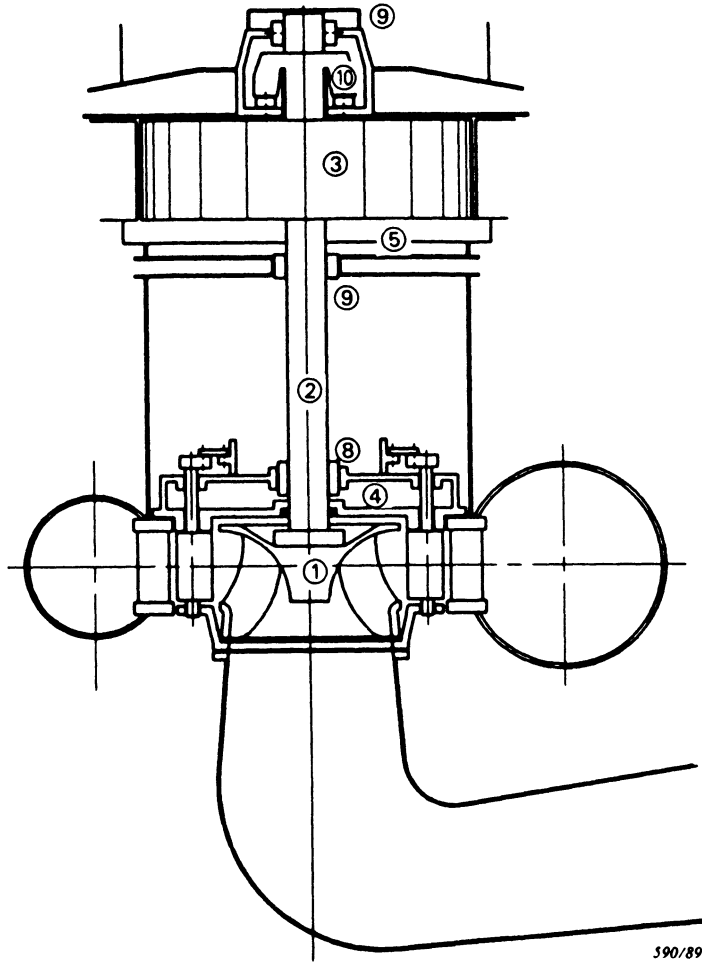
Example of a vertical suspended machine (Francis turbine) with three guide bearings
